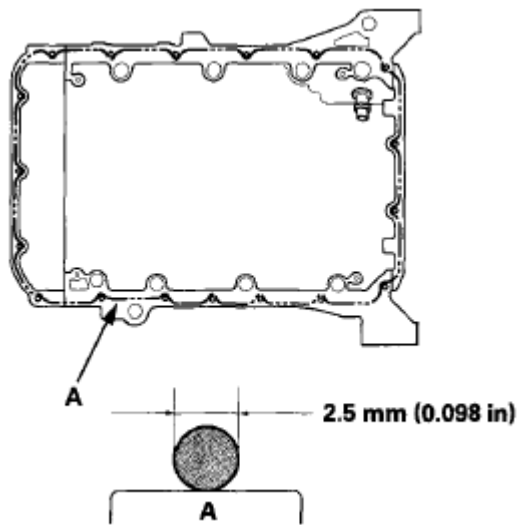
Identifying Diameter Bead Of Liquid Gasket Along Broken Line
